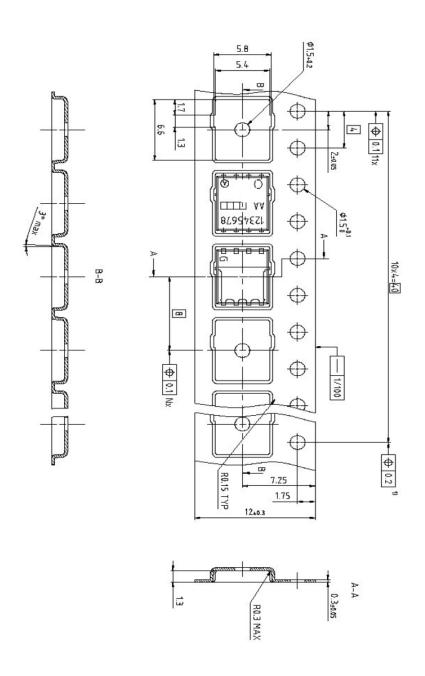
Outline Tape (PG-TDSON-8), dimensions in mm
